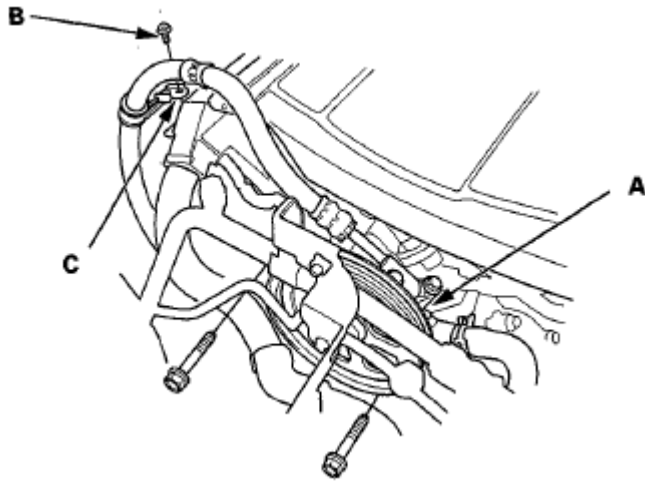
Identifying Power Steering (P/S) Pump & Bolt
